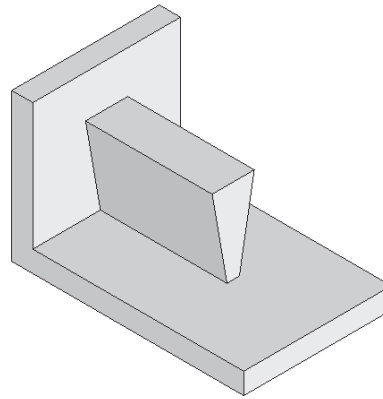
The resulting rib feature with the Draft outward check box selected
